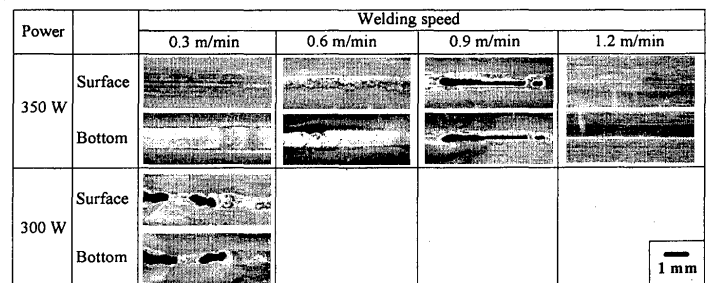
Optical microscope photographs of surface and bottom beads with a 1 mm gap holding jig
